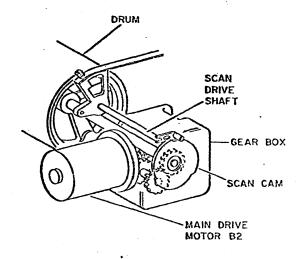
Main Drive Motor and Gear Box Assembly
